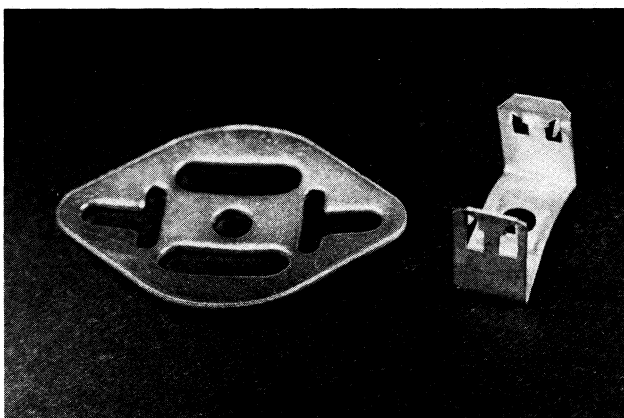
Mounting hardware for i-f transformers, which can be used to replace older 2.5-cm (1-inch) transformers.
